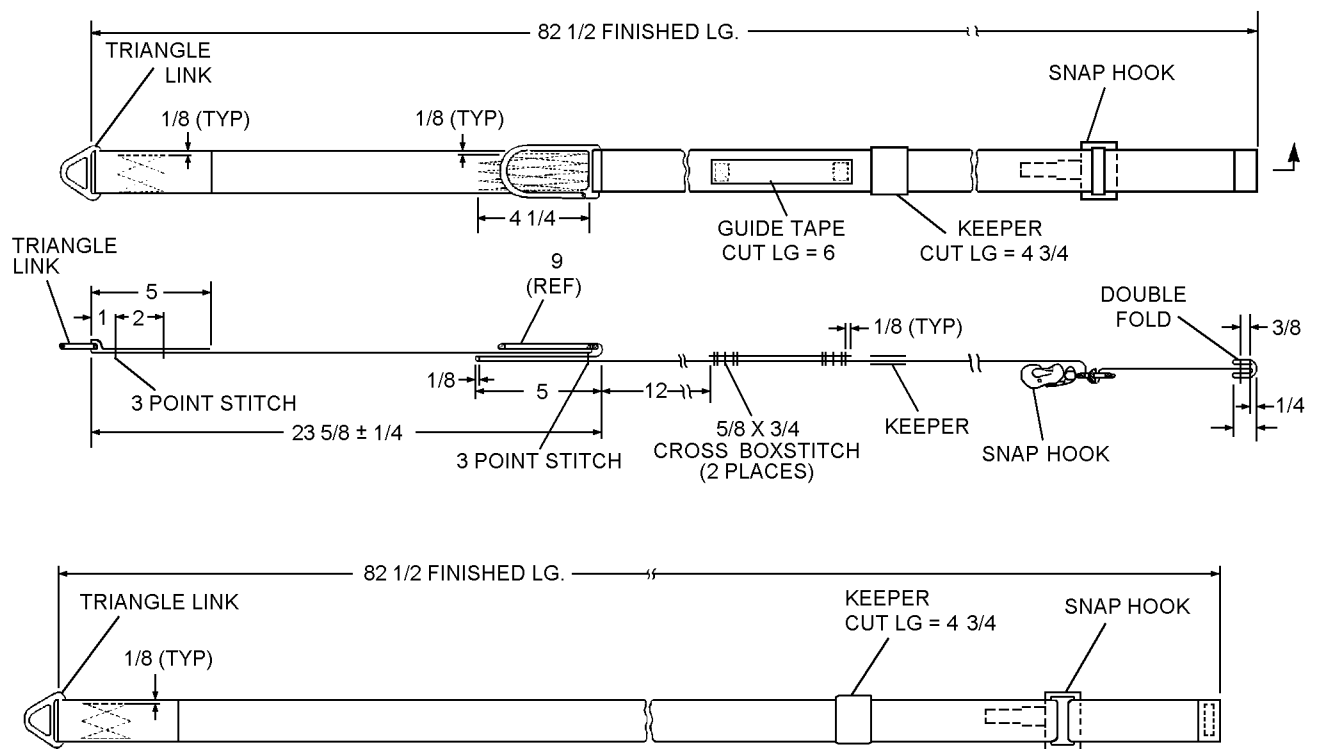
Vest Assembly with Hoisting Harness Installed (Interior) (Sheet 2 of 2)
